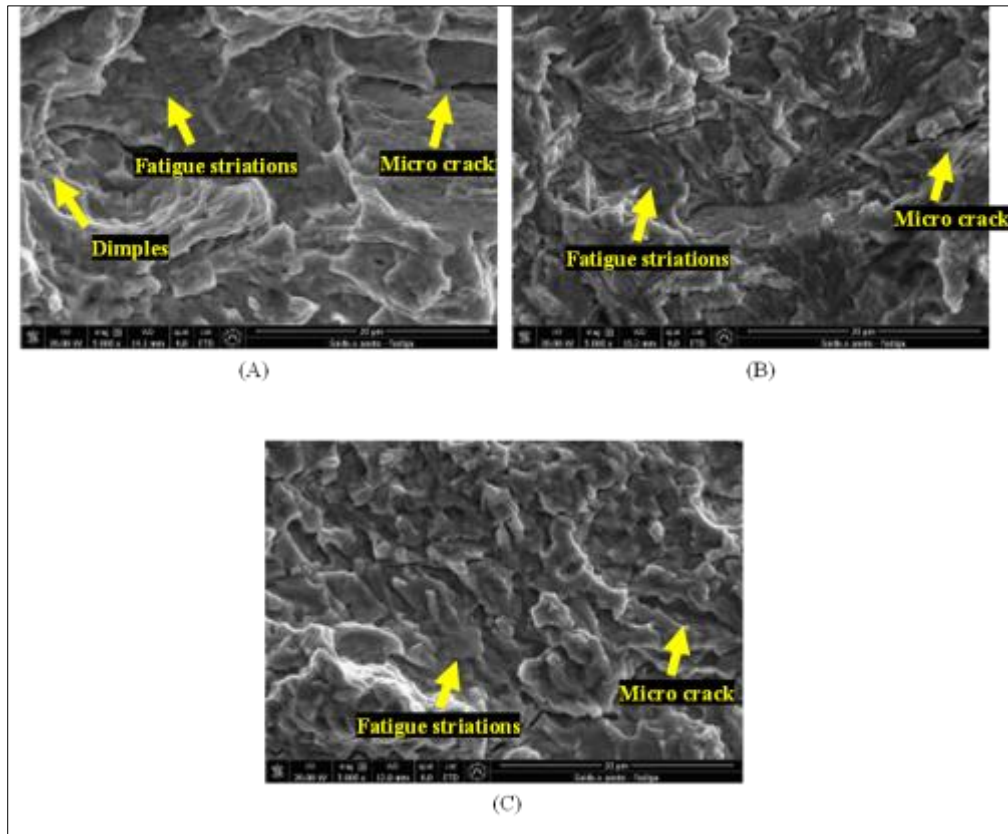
SEM image of fractures of TRIP780 steel specimens, which were 1.2 mm thick: a) spot weld region on the specimen with 8.6×10^3 cycles; b) spot weld region on the specimen with 1.1×10^6 cycles and c) spot weld region on the specimen with 1.1×10^6 cycles
